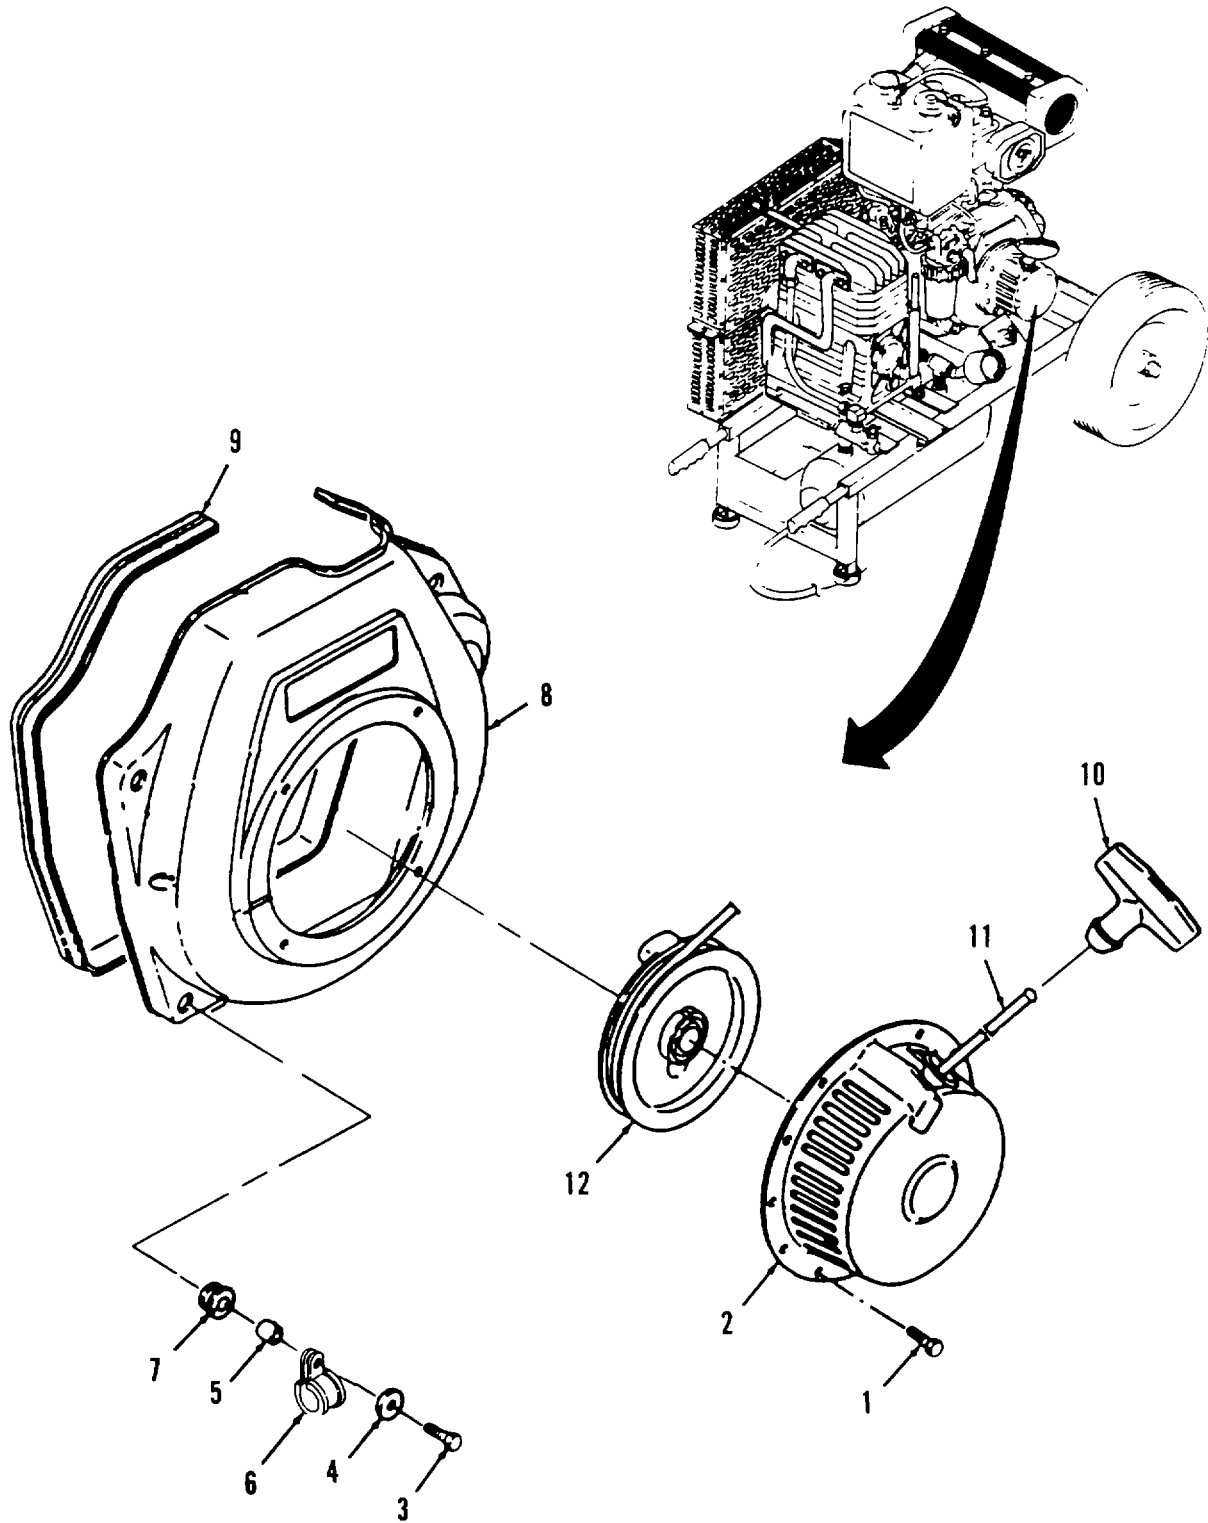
Recoil Starter and Flywheel Cover Repair and Replacement.
